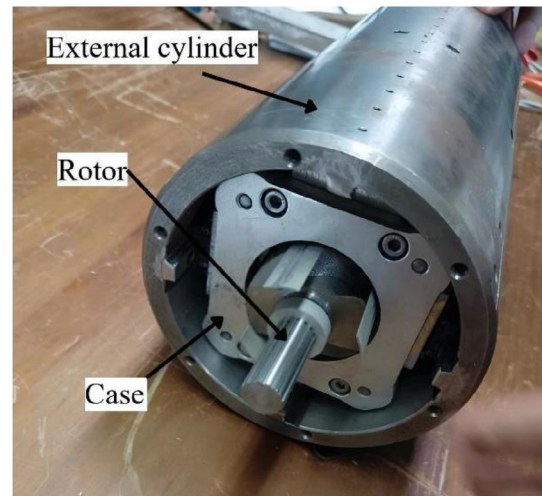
| The external cylinder with the rotor allocated inside the slider.
